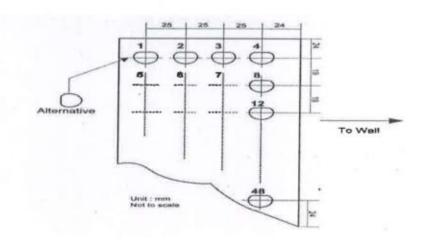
Typical FC patch panel of wall mounted FDF 48F (12 rows x 4 columns) (minimum spacing required)
